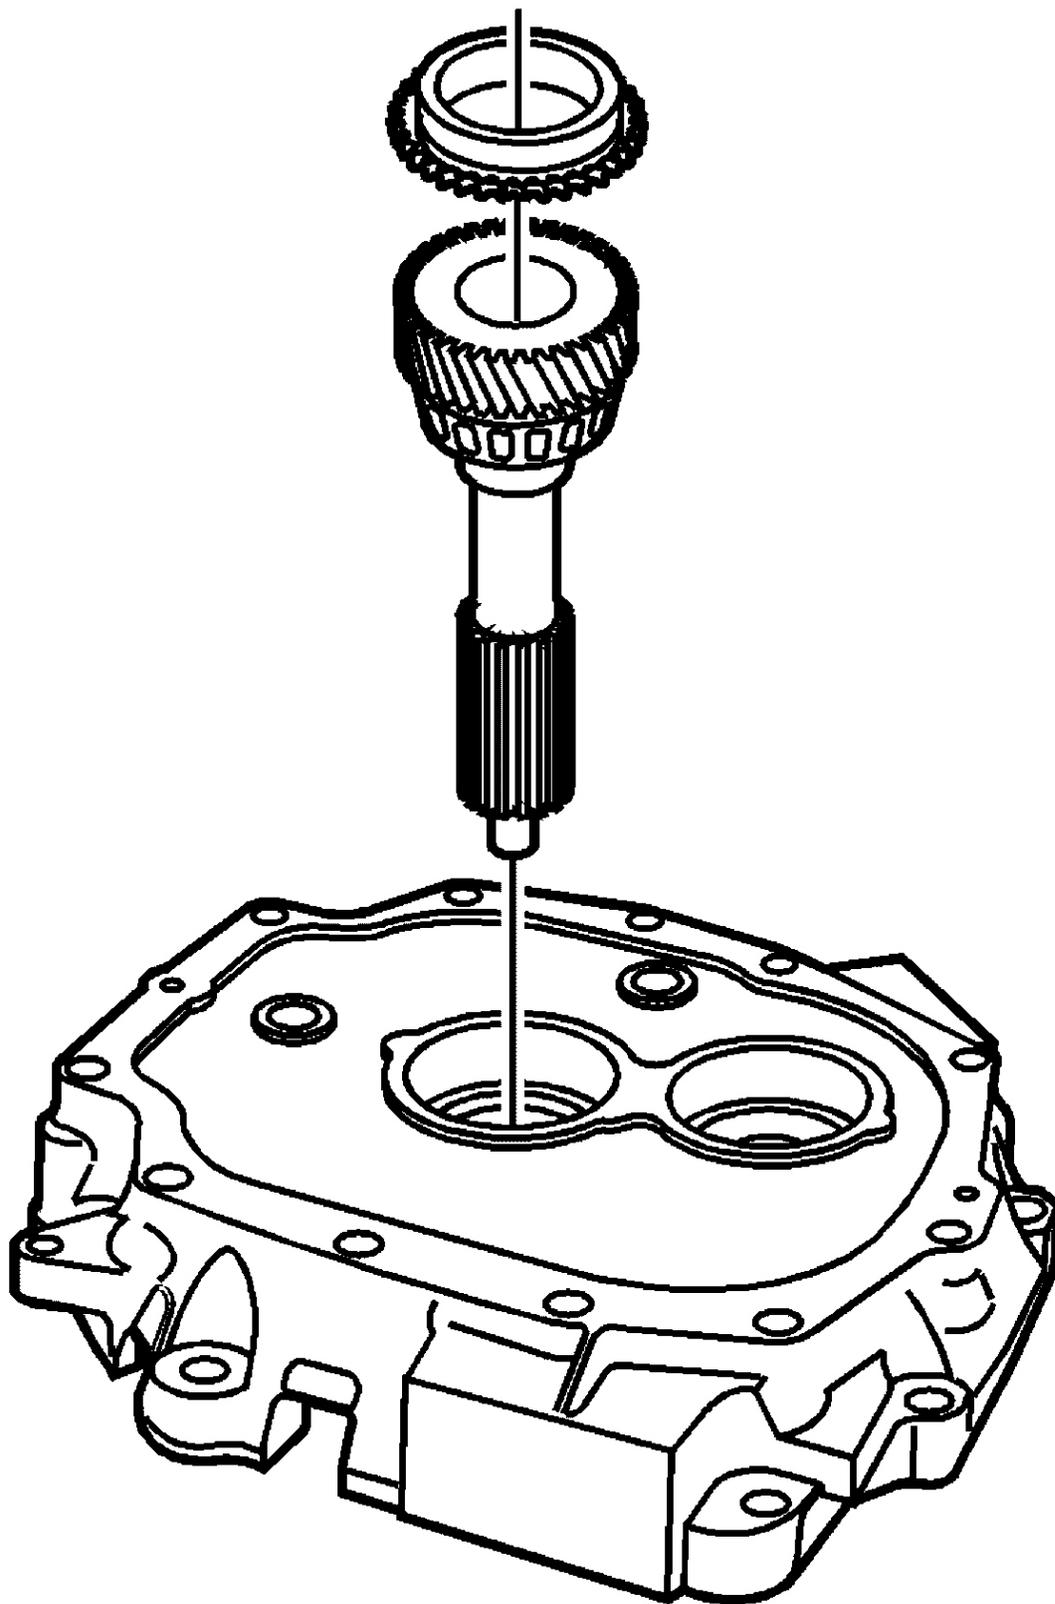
View Of 4th Speed Gear Blocker Ring & Input Shaft
